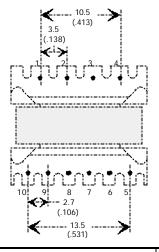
PHYSICAL DIMENSIONS mm (INCHES)
